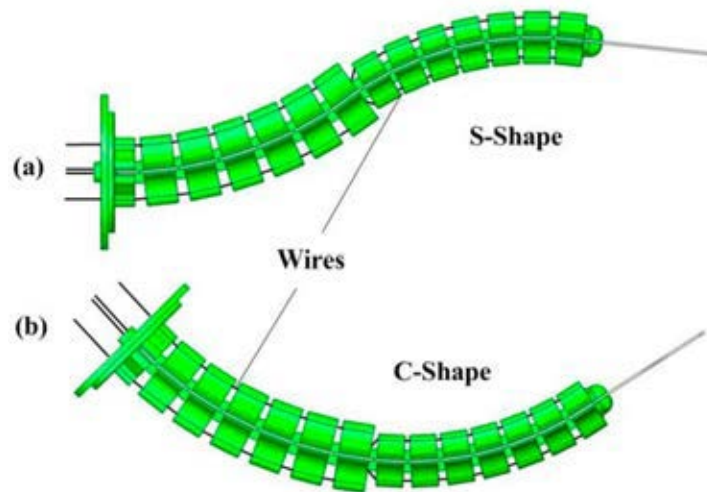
S-Shape and C-Shape Bending of the Wire-Driven Tail
